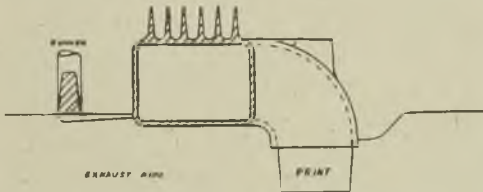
SECTION OF AN AIR-COOLED EXHAUST PIPE, SHOWING METHOD OF MOULDING AND RUNNING.
